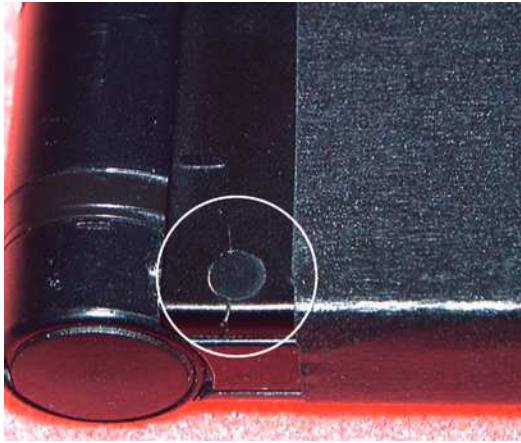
shows the catastrophic failure of a boss in a PC/ABS part fastened with a thread forming screw. This happened in a matter of weeks after the product was shipped. Changing to a thread cutting screw completely eliminated the problem.
